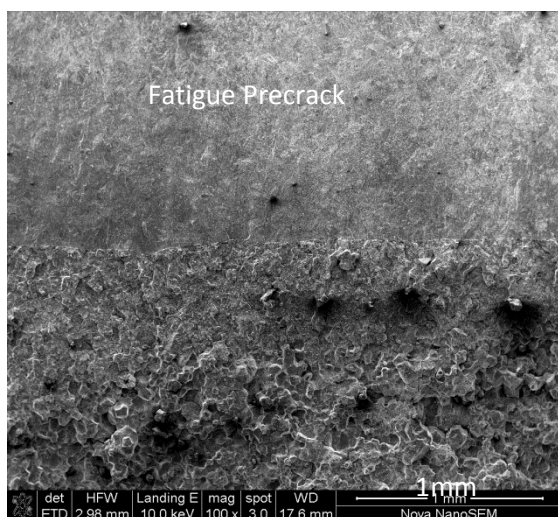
Fracture surface of 480°C temper WOL specimen, showing the difference between the fatigue precrack and SCC surface
